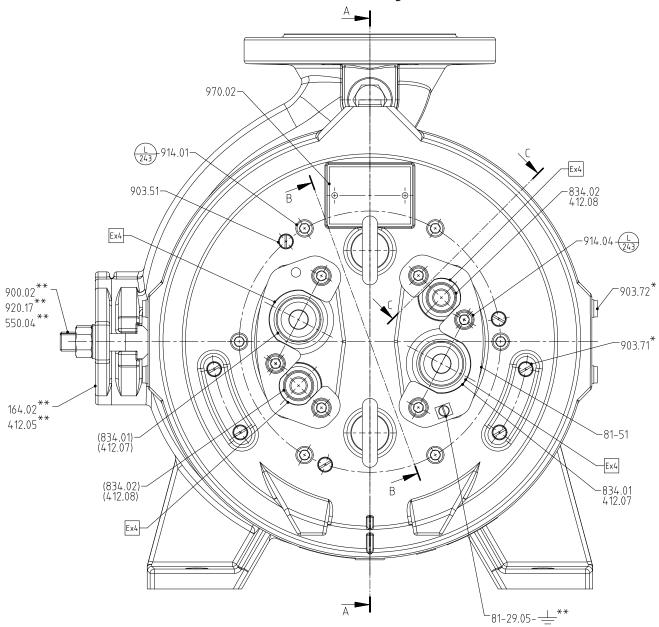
General assembly drawing of Amarex KRT, filler and drain openings
